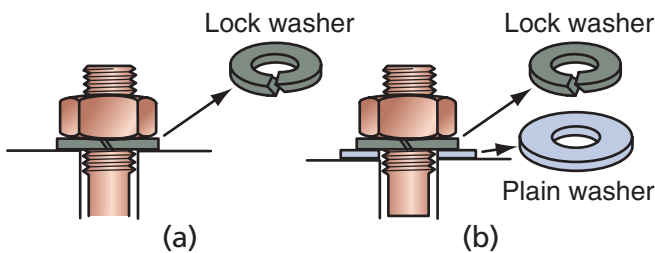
(a) A typical split-ring-type lock washer. (b) The correct installation of a plain (or flat) and lock washer. (Parts [a] and [b]: Copyright by American Honda Motor Co., Inc. and reprinted with permission.)
